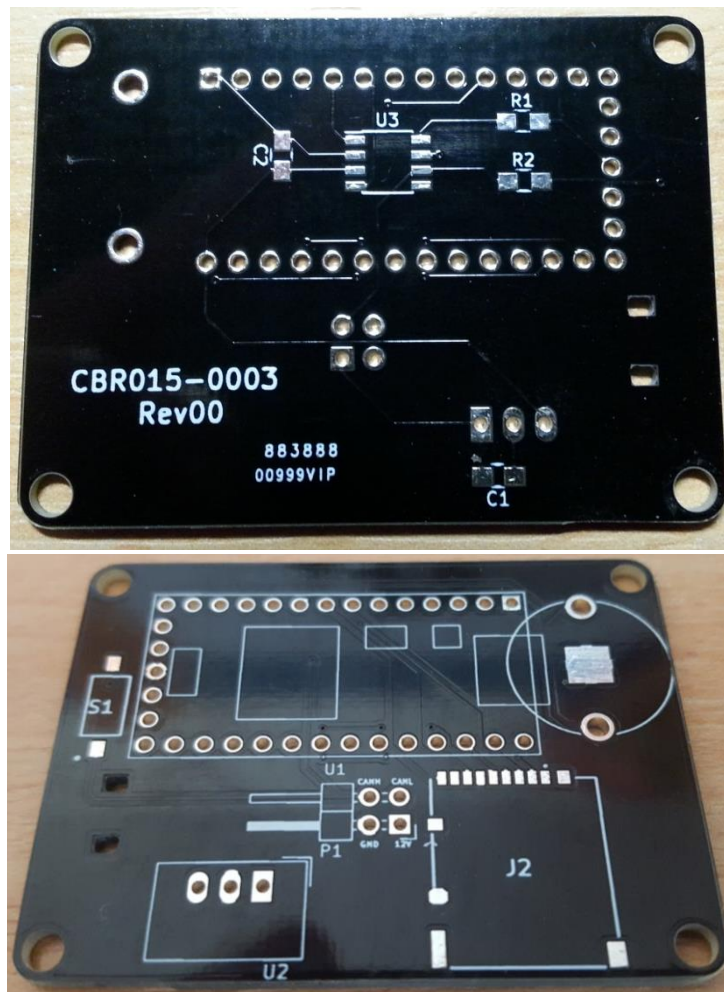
CBR015-0003 CAN DATALOGGER PCB
